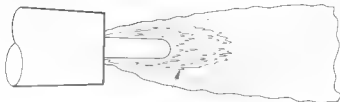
Oxidizing flame. The inner cone is the primary flame.
